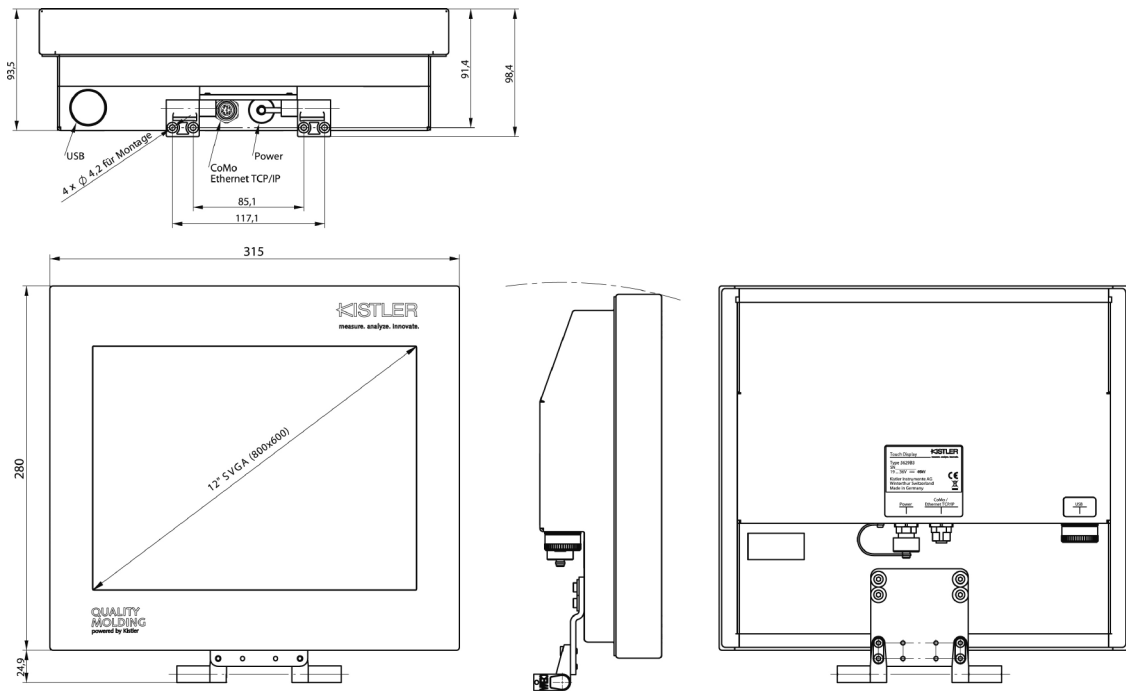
Dimensions CoMo Injection touch display 12,1 " Type 5629B3
